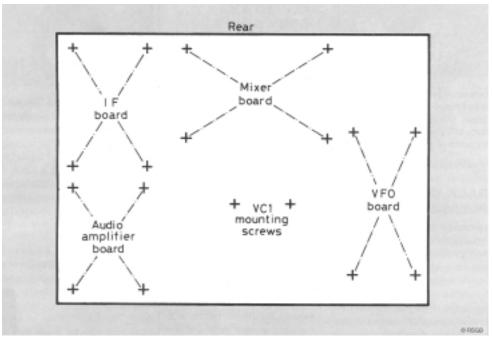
Fixing holes for each module are best measured from each printed circuit board or matrix board
